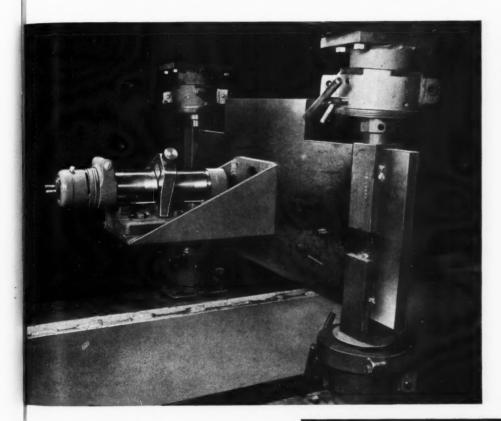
Collimator clamped to bracket that is attached to a fixture bulkhead. Four adjustable clamps are used to hold and position the header of the fixture
